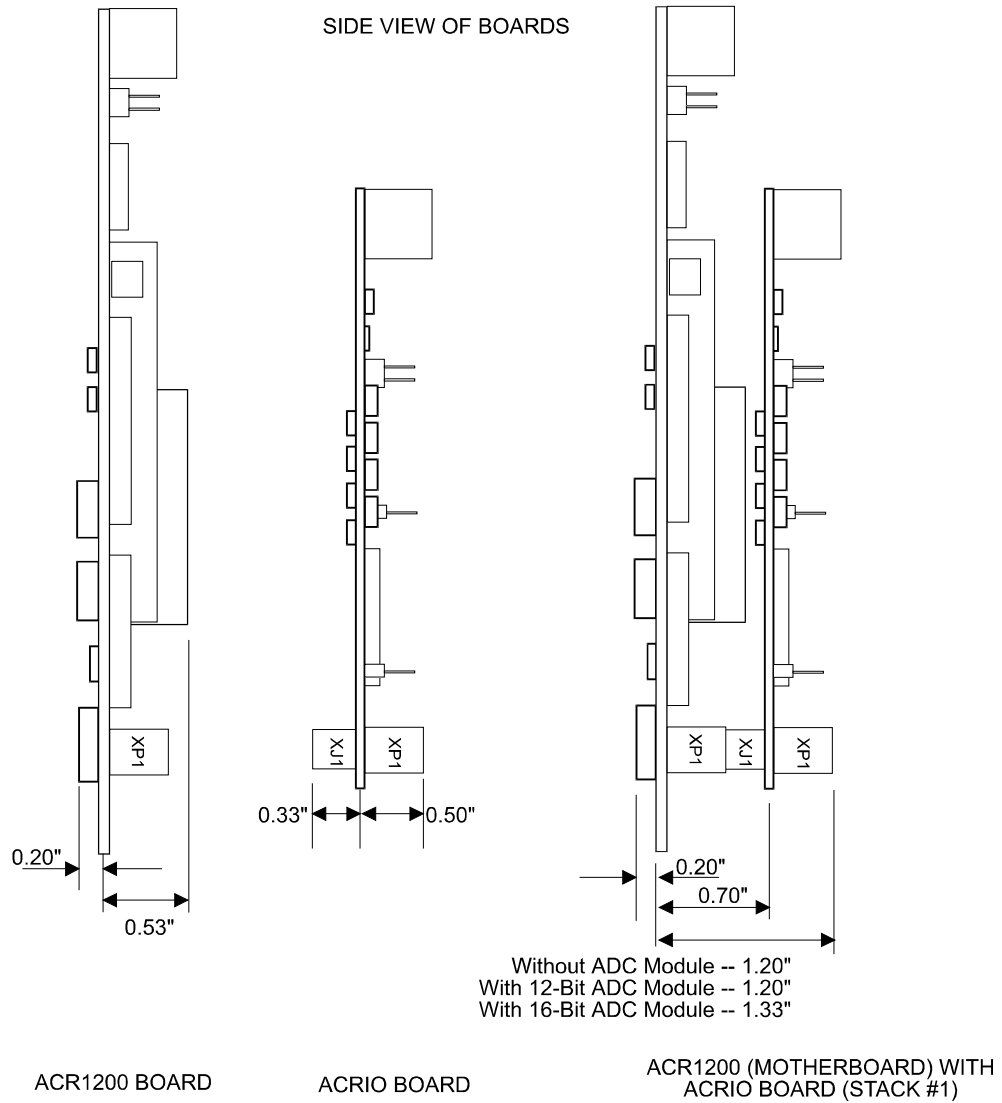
ACR1200 Board Stacking Mechanical Dimensions Examples
